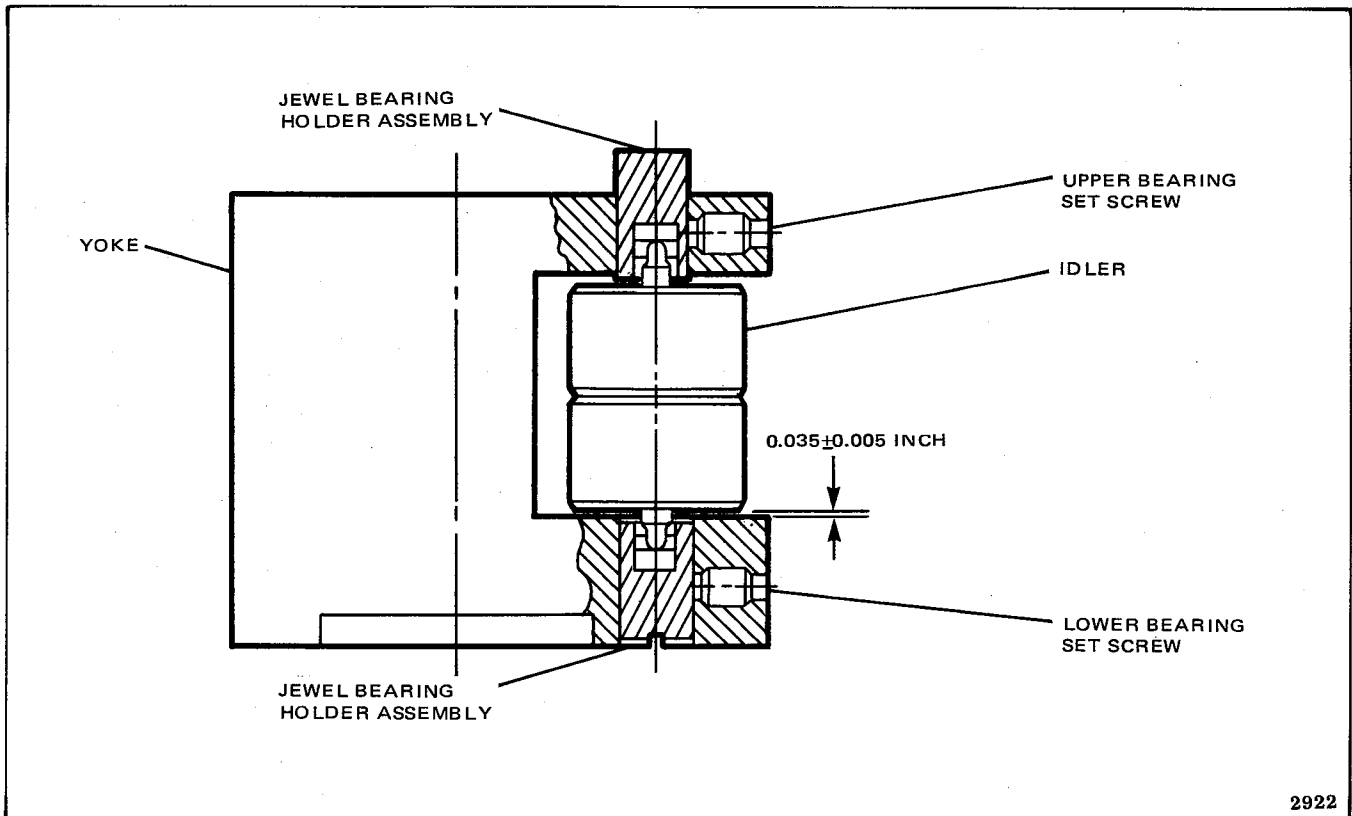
Scrape Flutter Idler, Side Cross-Section View
